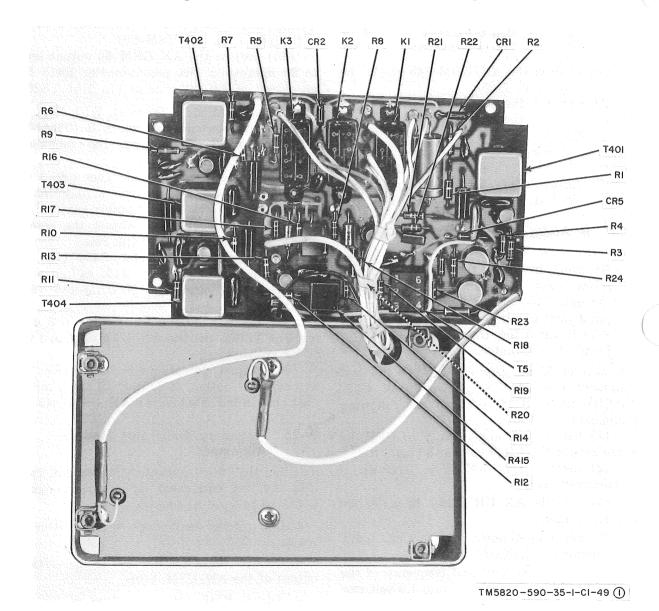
IF Audio module, rear view, component boards removed (part 1 of 2).
